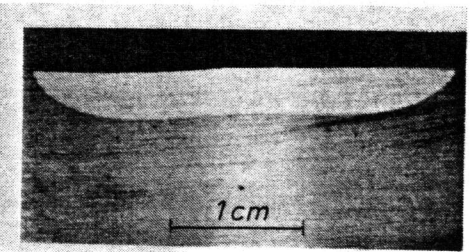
Geometry of the quenched surface on the axial cross section of a segment
